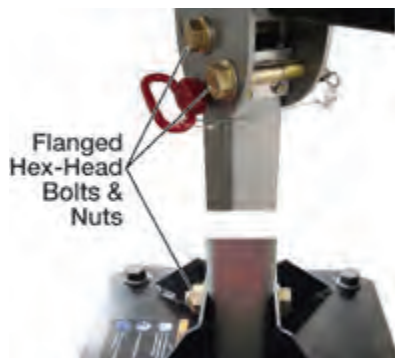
Flanged Hex-Head Bolts & Nuts Locations
